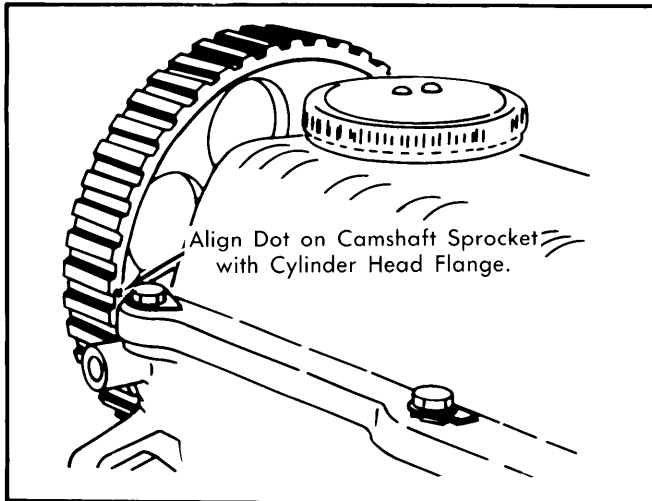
Index Mark on Camshaft Sprocket Aligned with Cylinder Head Flange
